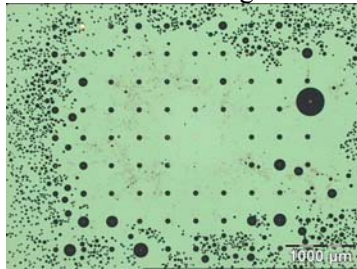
light microscope image of a test IC with Ti/Pt/Au pad metallization after AuSn reflow soldering tests using AuSn solder preforms
